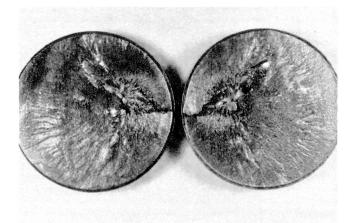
Four Inch Diameter Crankshaft Failure at a Snap Ring Groove by Bending Fatigue with Severe Stress Concentration.
